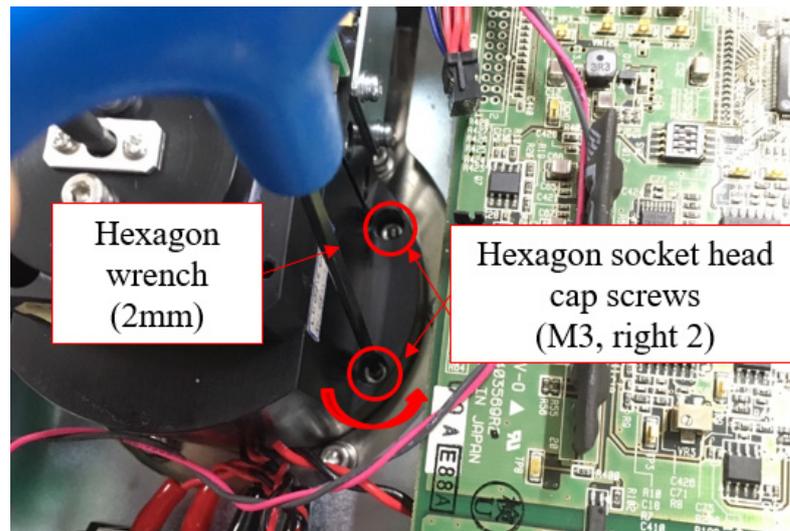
Remove the bolts with hexagon sockets (4 points) with a hexagon wrench (2mm)
